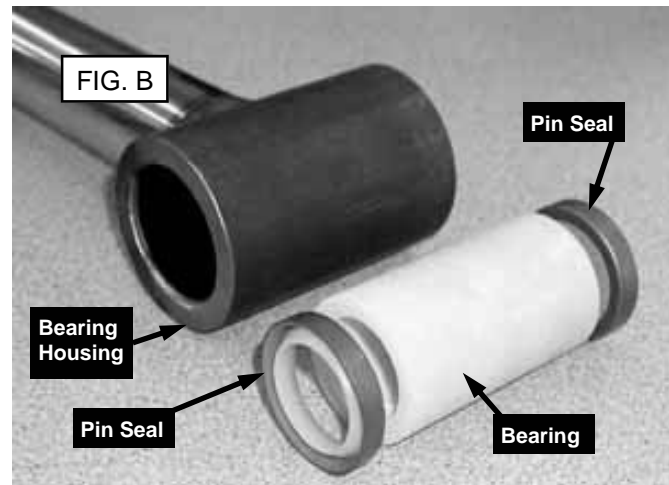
FIGURE B. Even though the composite bearings on your GP/GL-Series loader have excellent resistance to dirt particles, (10) of the (12) pivot points on the loader have an added feature. They are equipped with pin seals on each end of the bearing housing. These seals do an excellent job of keeping out dirt, grime, manure and fertilizer dust.
